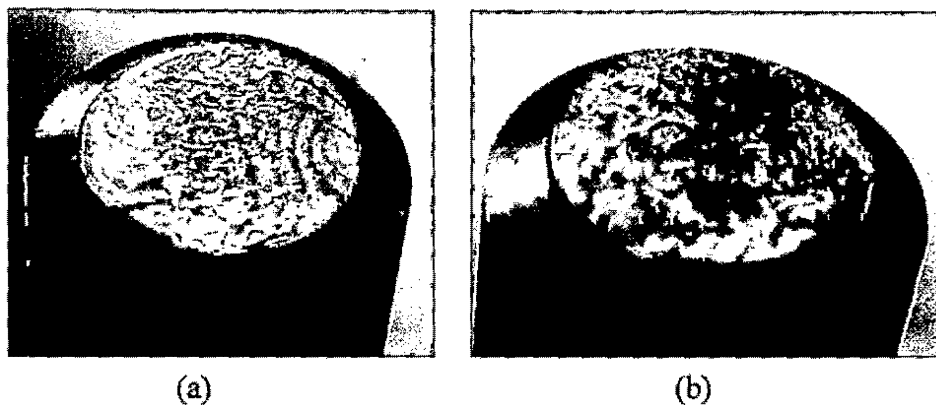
Isometric view of fracture surfaces of sharp notched specimens from tensile experiments at (a) 0.5 mm/s and (b) 0.05 mm/s.
